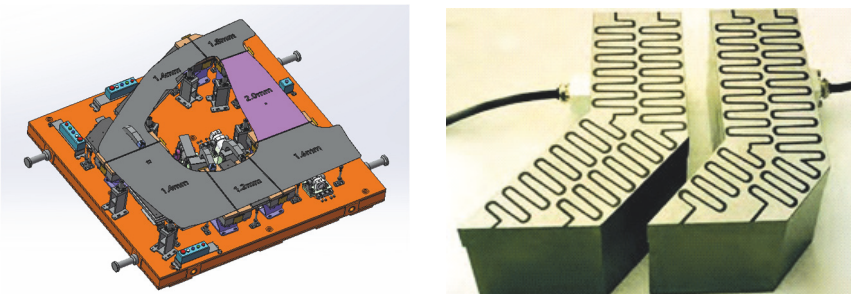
Semi-automatic fixture and strong magnetic suction cup for spot welding
